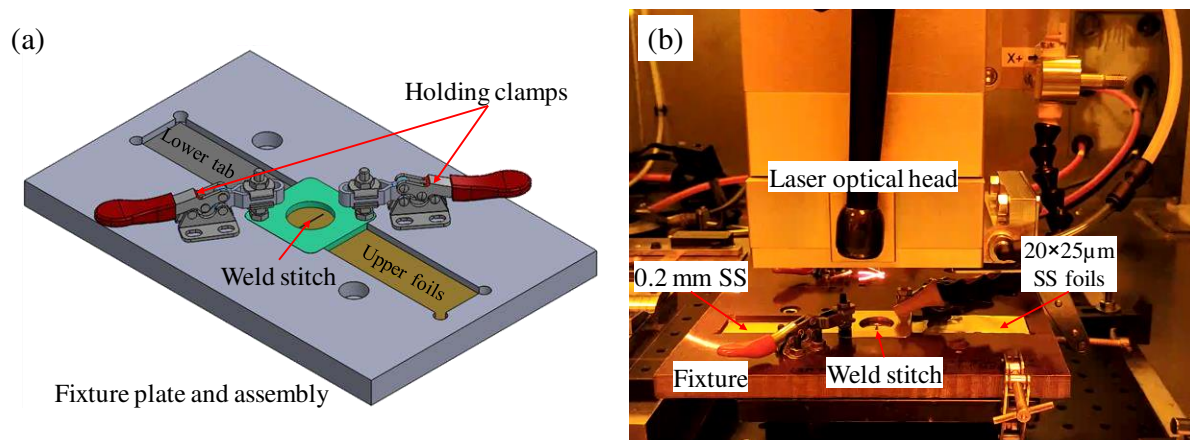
(a) Schematic of the fixture used to make joints, and (b) blue laser welding set-up.
